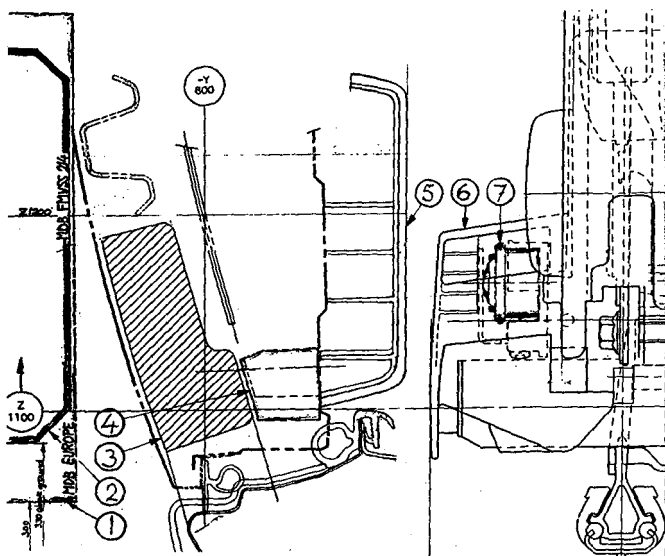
Cross section through lower door and seat at sensor location. Euro-bumper (1), US-bumper (2), SIPS-blocks (3 and 4), doorpanel (5), sidepanel of seat (6), sensor (7).
